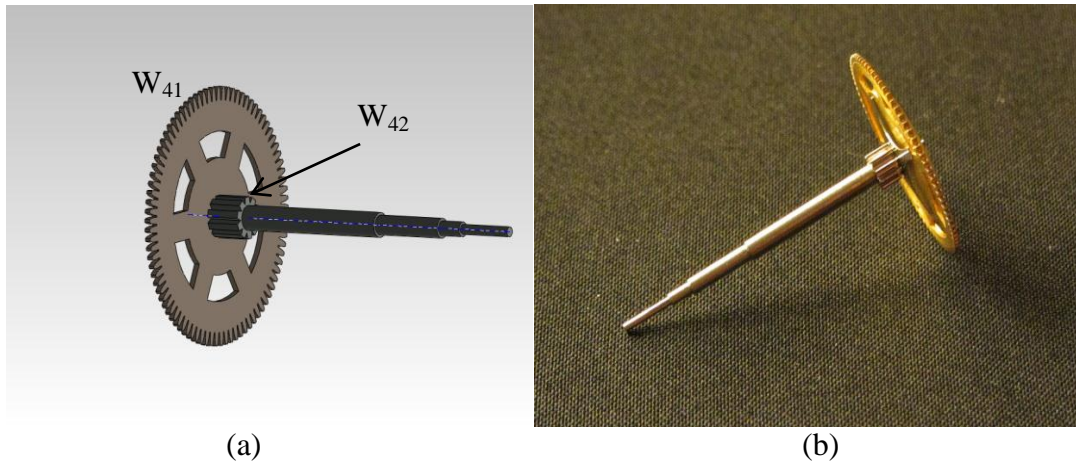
Fourth wheel, W_{41} , and wheel, W_{42} , of the gear train with (a) Solidworks view, and (b) photograph of the fourth wheel assembly
